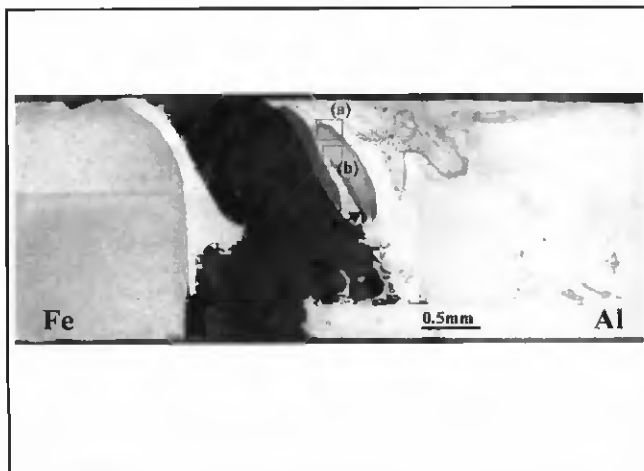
Cross-sectional view of the broken part of the joint after tension test. Fracture occurred along the interface between the steel fragment and the aluminum matrix.
